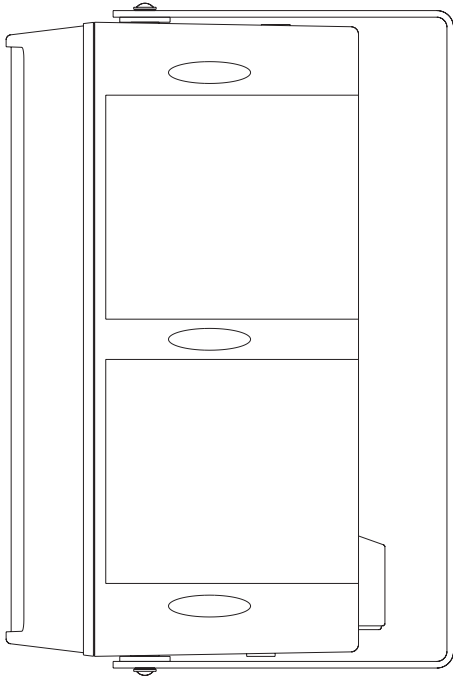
Sx80PI enclosure with Sx80SM stand mounting kit.
